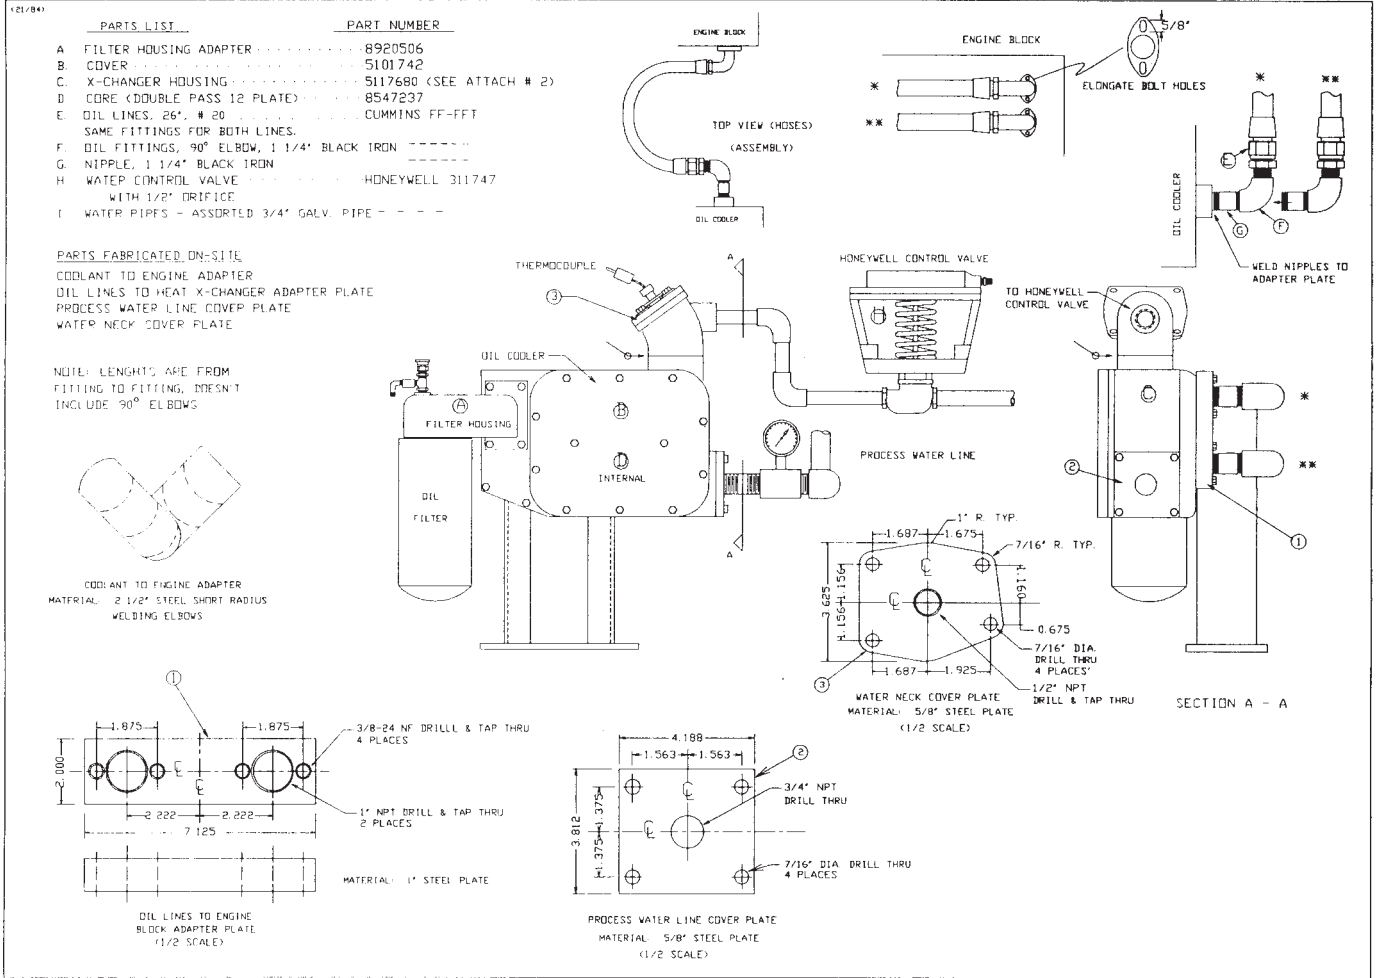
External Oil Cooler, 6V92TA Engine Oil Test
